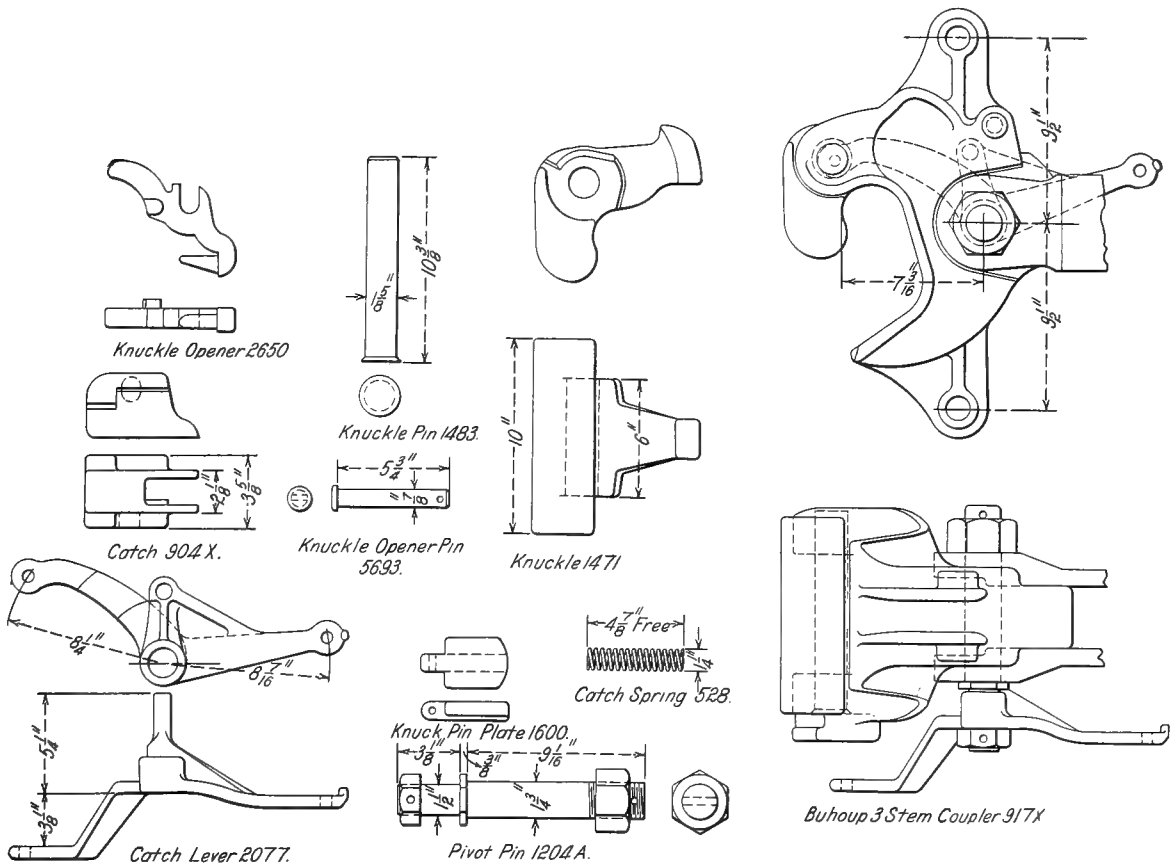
Buhoup Three-Stem Passenger Coupler and Parts. McConway & Torley Company.
